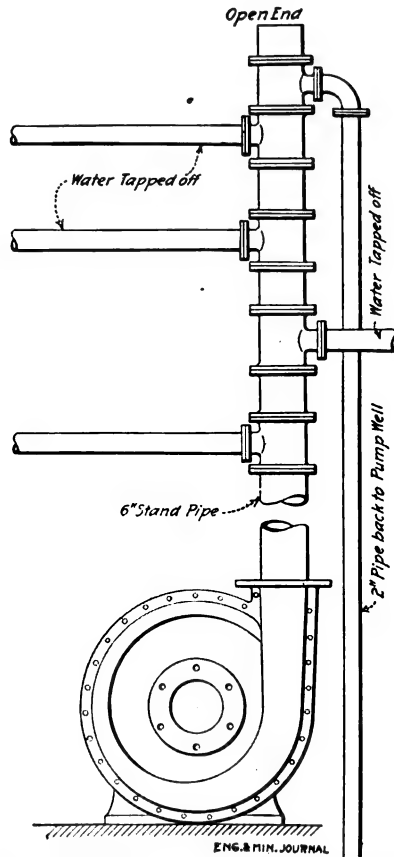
CENTRIFUGAL MILL PUMP WITH STANDPIPE.
